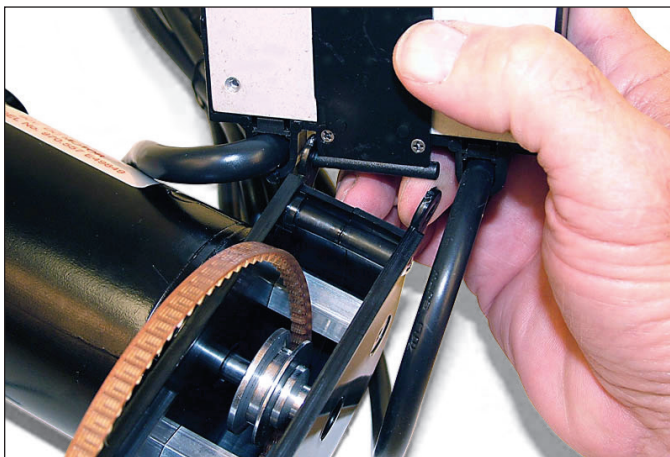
Insert “ears” of speed control housing into holes in belt guard tabs.
